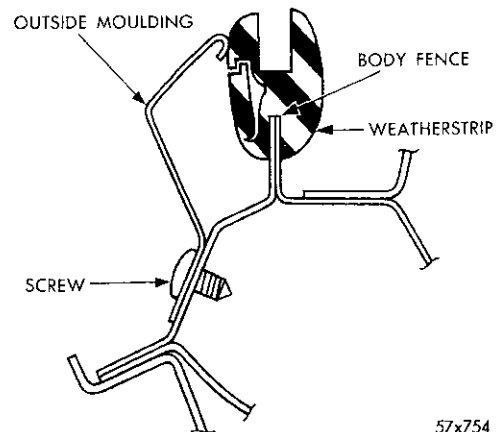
Windshield Weatherstrip and Moulding—Lower
